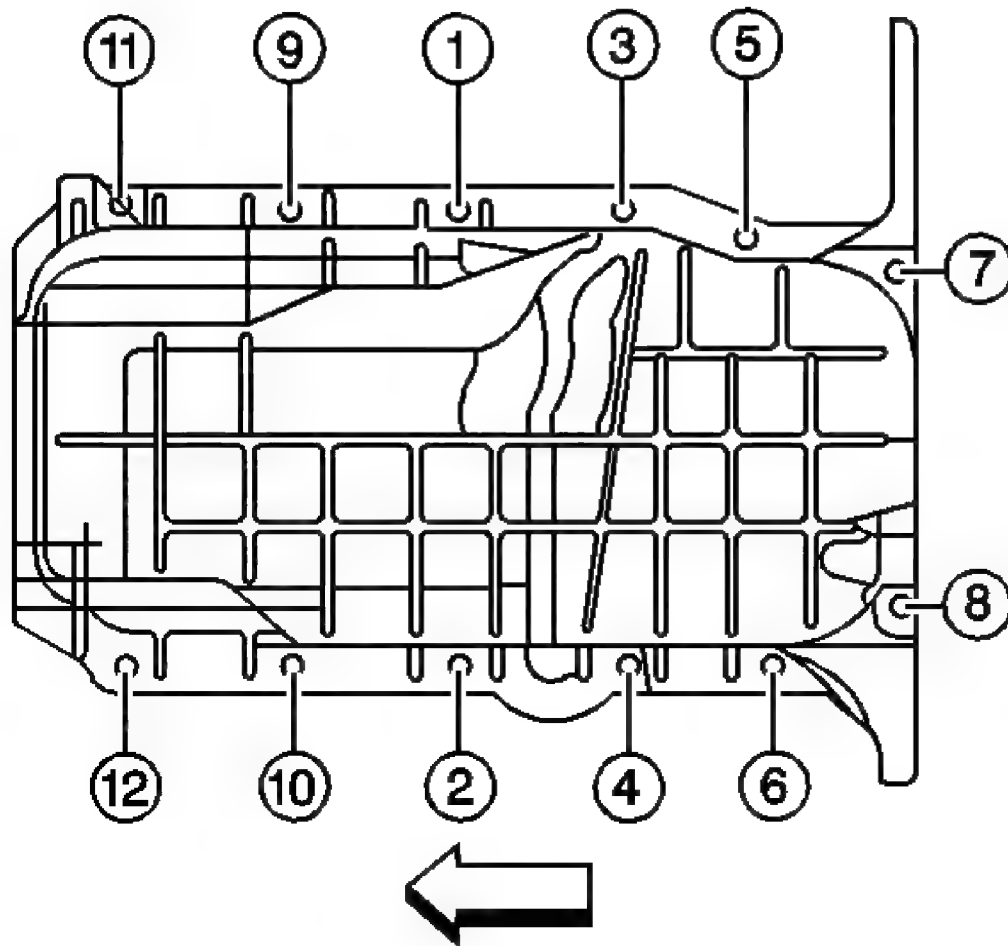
Identifying Oil Pan Bolts & Nuts Tightening Sequence
